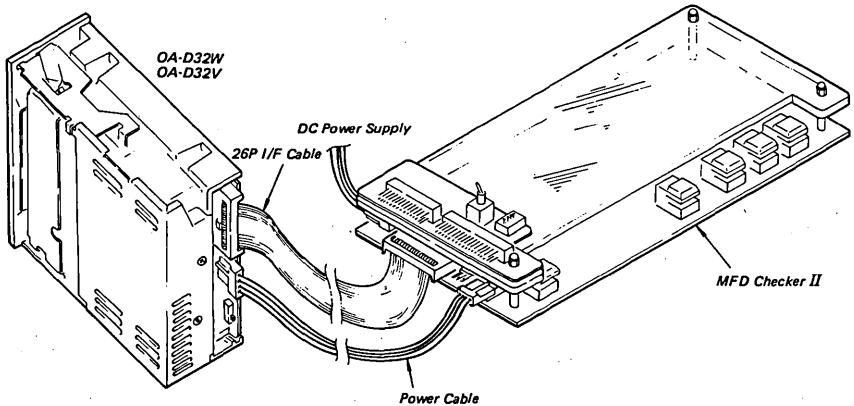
Drawing of Connection Between Disk Drive and MFD Checker II
